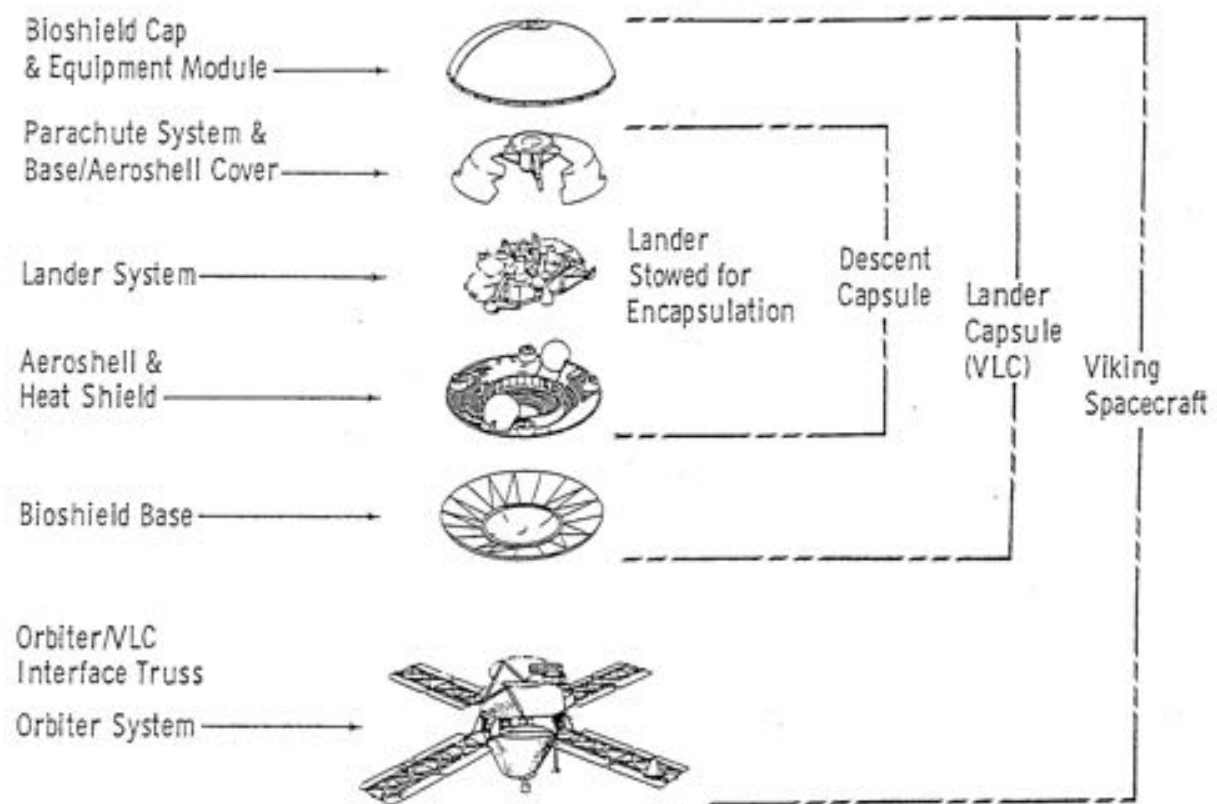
Exploded View: Major Elements of Viking Lander Capsule
